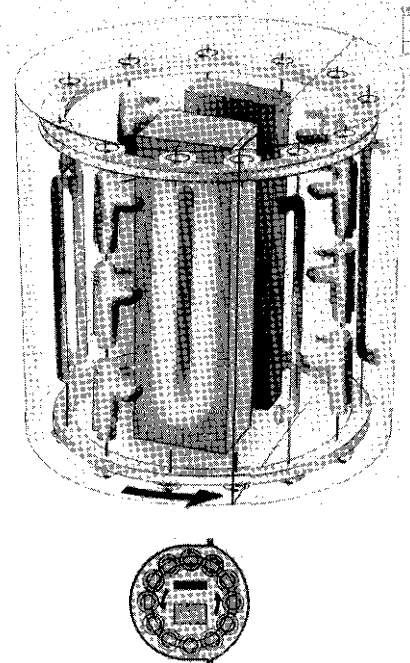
Schematic drawing of a batch-type coating system for larger parts.
